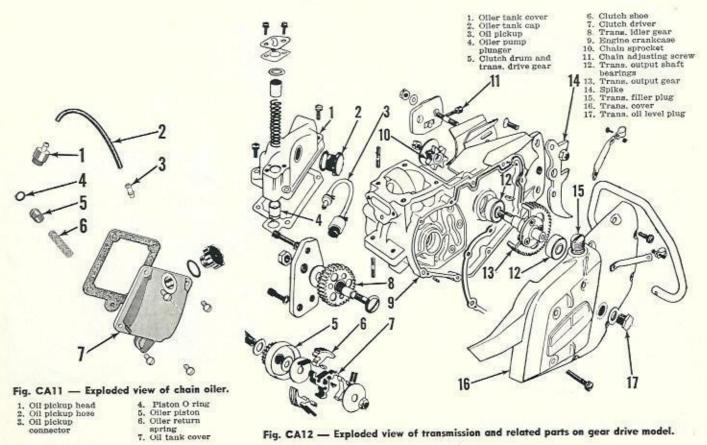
Exploded view of transmission and related parts on gear drive model.
